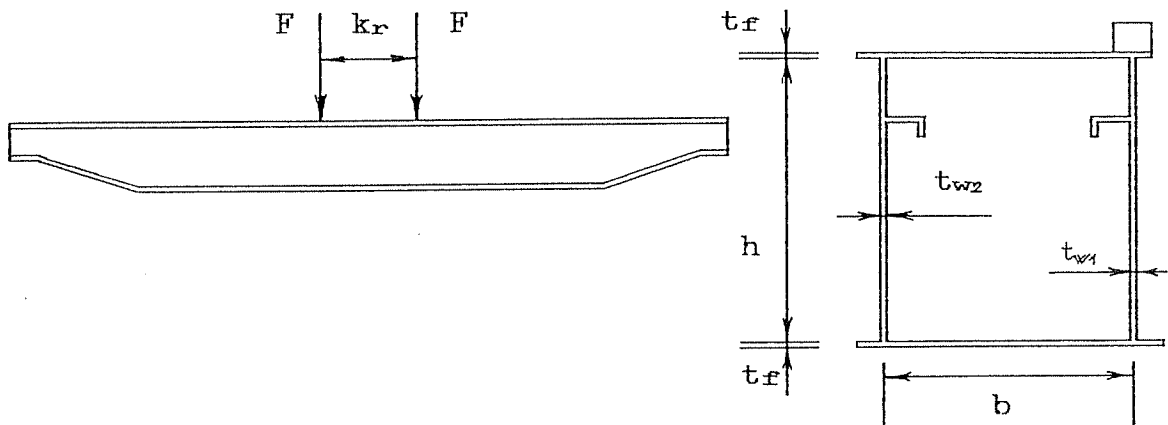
Cross section of the welded main girder of overhead travelling crane
